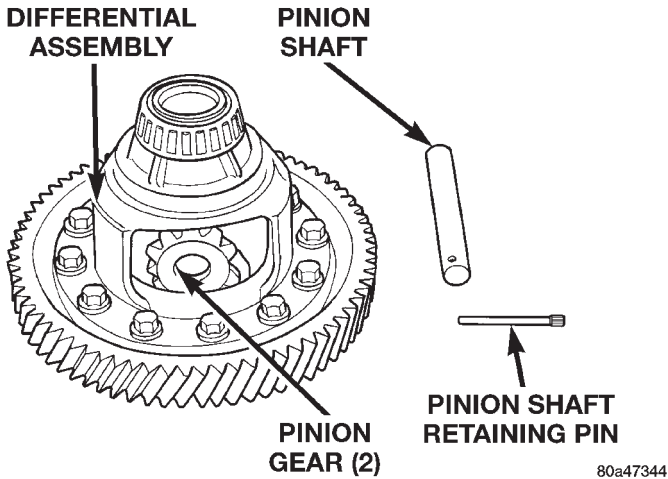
Remove Pinion Gears, Side Gears, and Thrust Washers by Rotating Side Gears to Opening in Case
